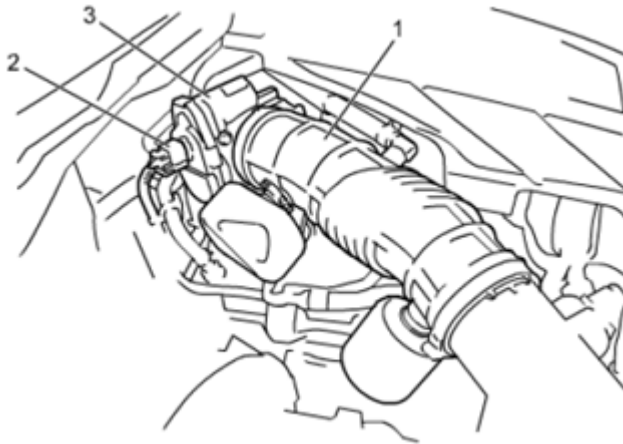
Identifying Air Cleaner Outlet Hose And Throttle Body Connector With Throttle Body
